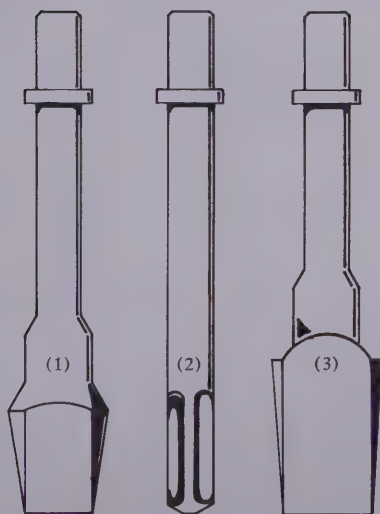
Three working tools for impactor: (1) 30-degree breaker, (2) relieved moil, and (3) frost spade.
